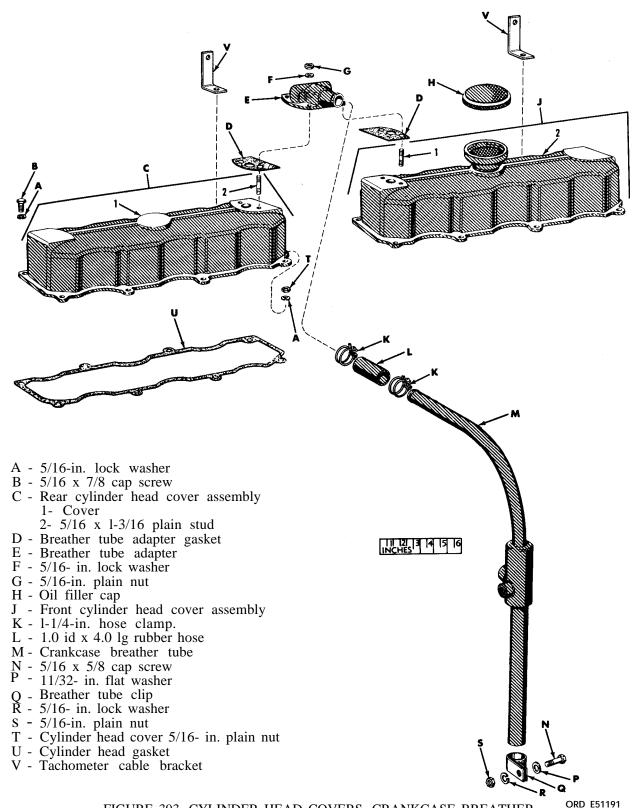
CYLINDER HEAD COVERS, CRANKCASE BREATHER, AND RELATED PARTS - EXPLODED VIEW,
